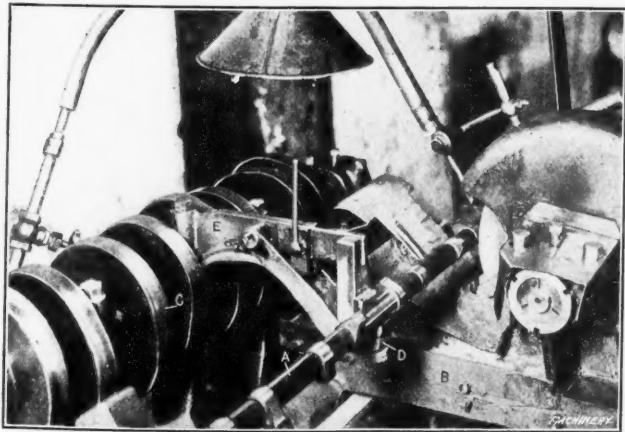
Le Blond 16-inch Engine Lathe rigged up with Special Fixtures for grinding Cams
